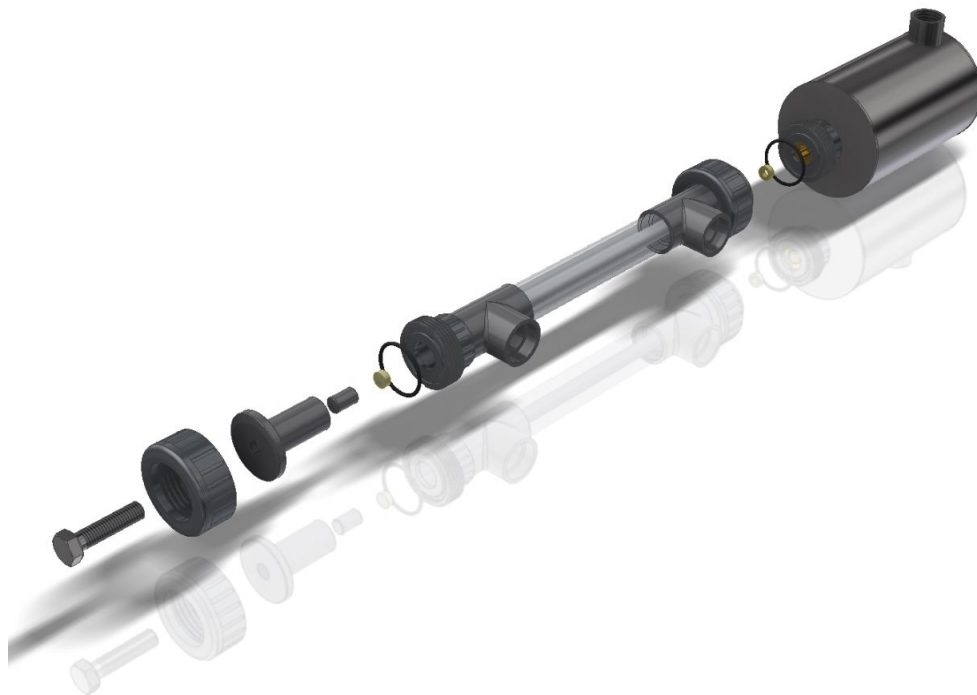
Exploded view of the revised design of the inlet manifold assembly consisting of the pressure vessel, membrane housing and membrane
